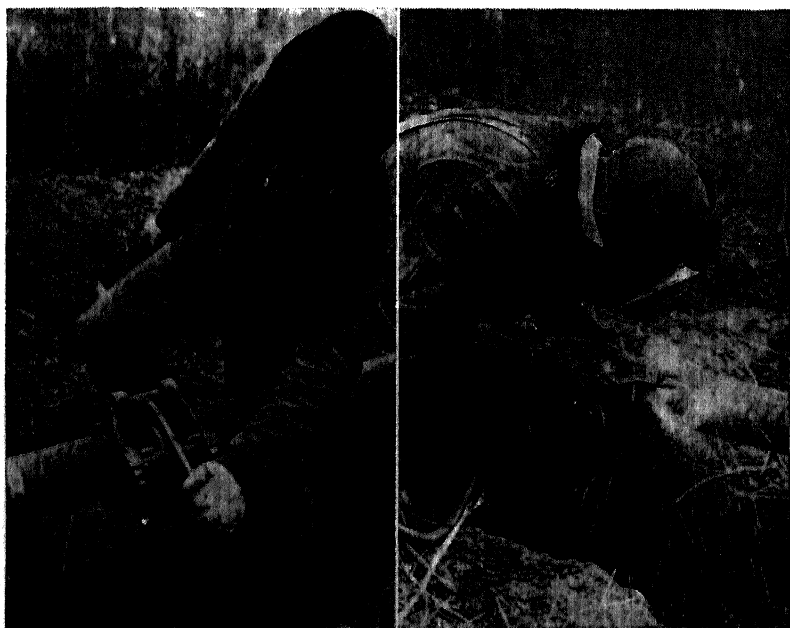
Building a 4-in. oil feeder line in the Illinois field. This was welded by the stove-pipe method. Left: Line-up clamp brings the ends of the pipe together for tack welding. Right: Completing the weld — made with three passes of 3/16-in. Type A shielded arc electrode.
